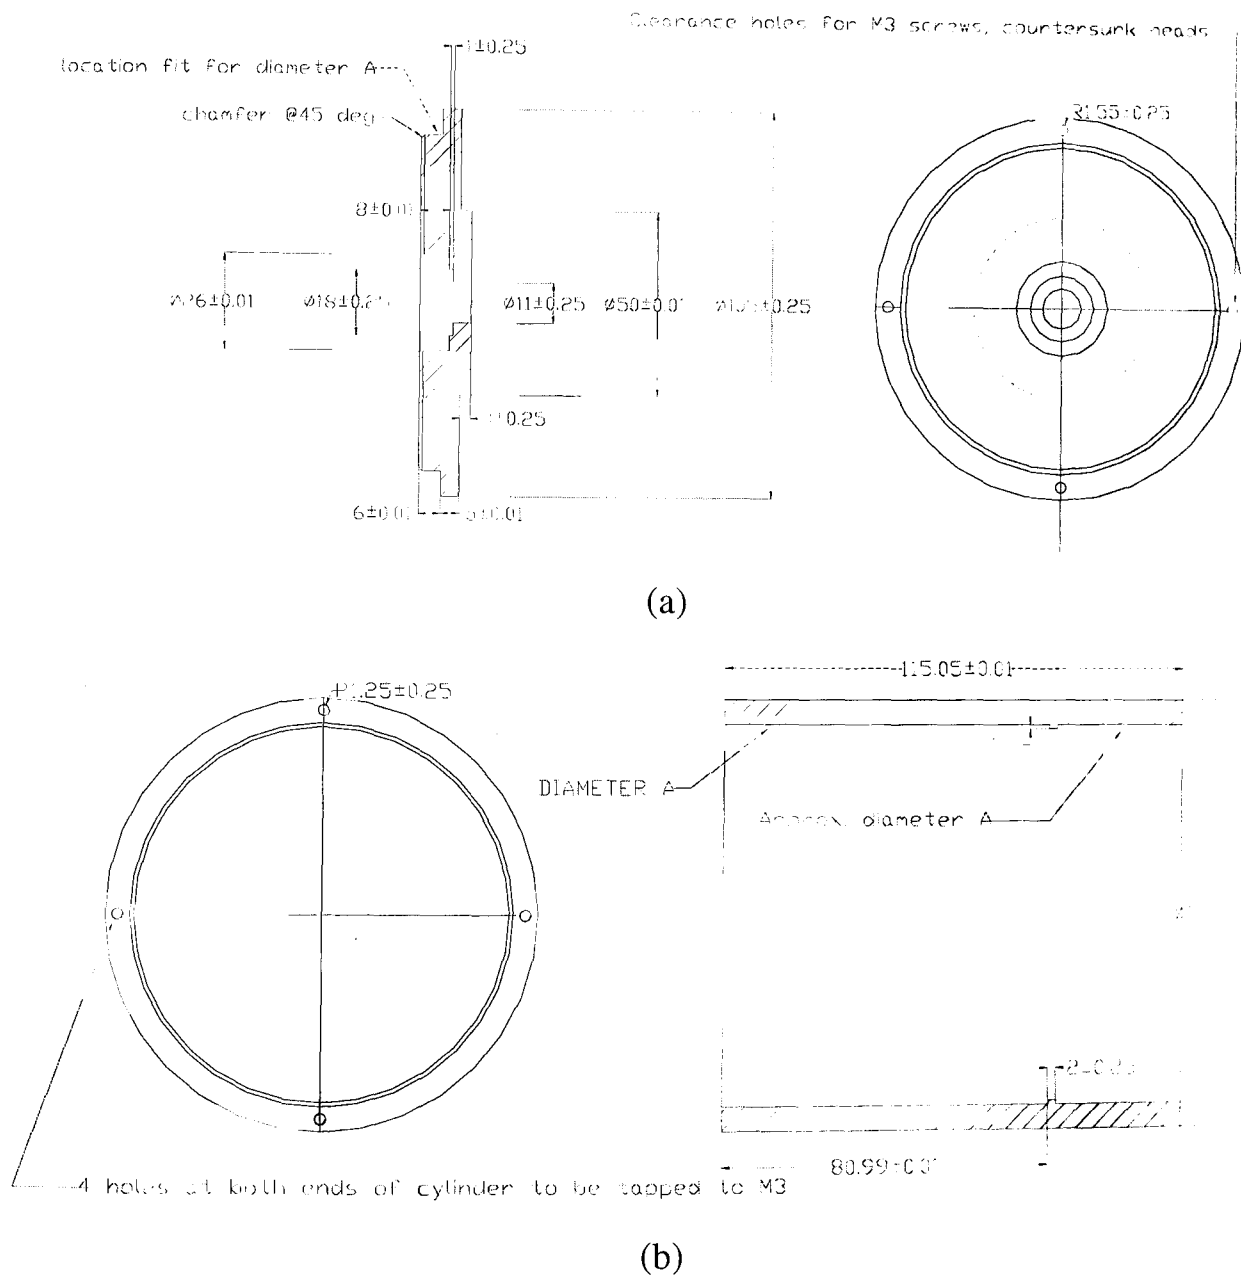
Details of (a) End-caps, (b) Frame, all dimensions in mm
